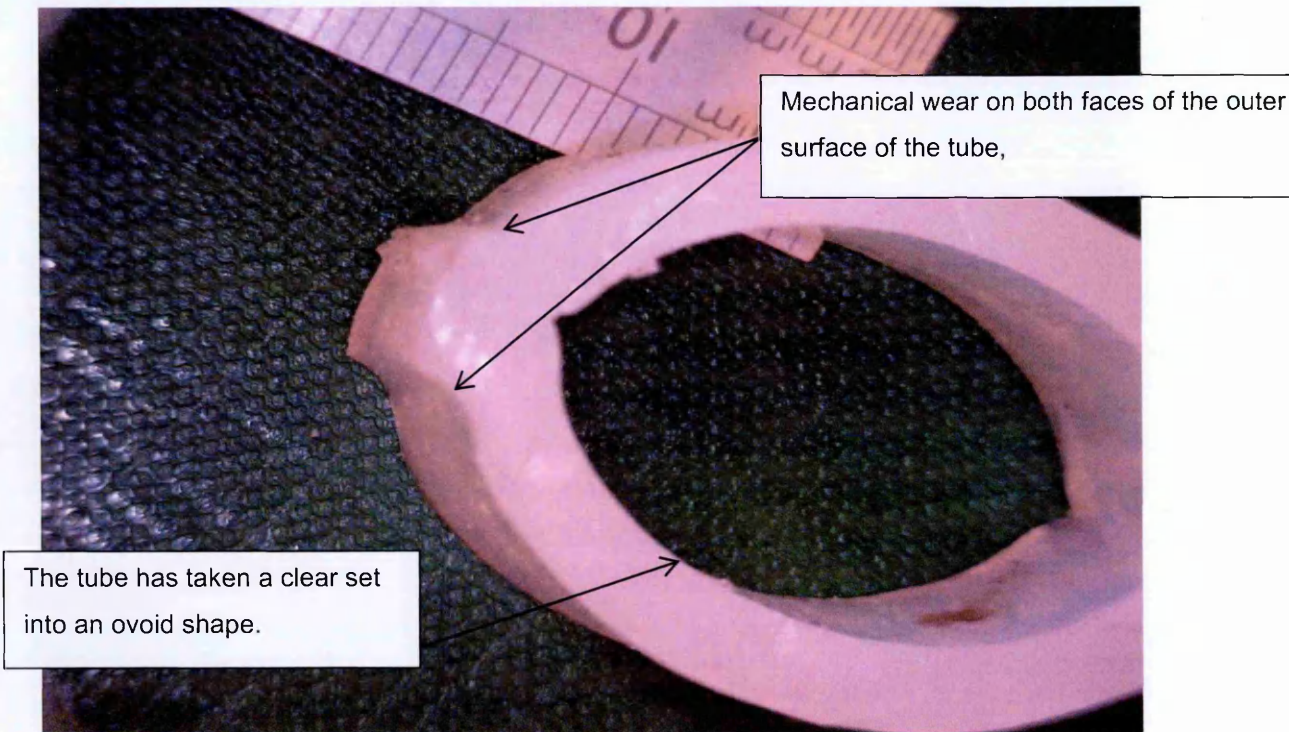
Section 2 through a silicone rubber tube showing damage due to mechanical wear
